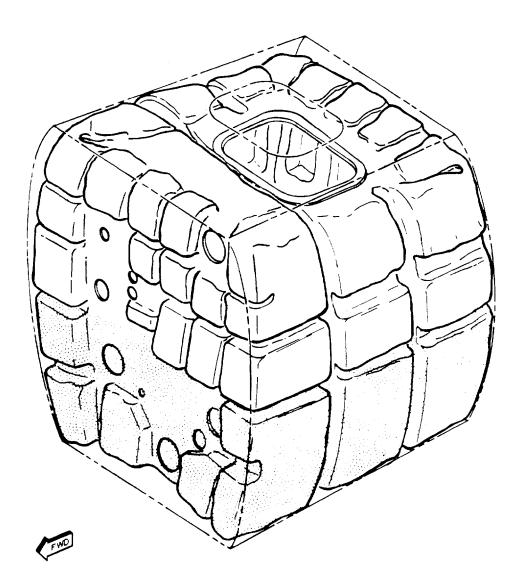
Removal - No. 2 Fuel Tank Folding (Sheet 1)
